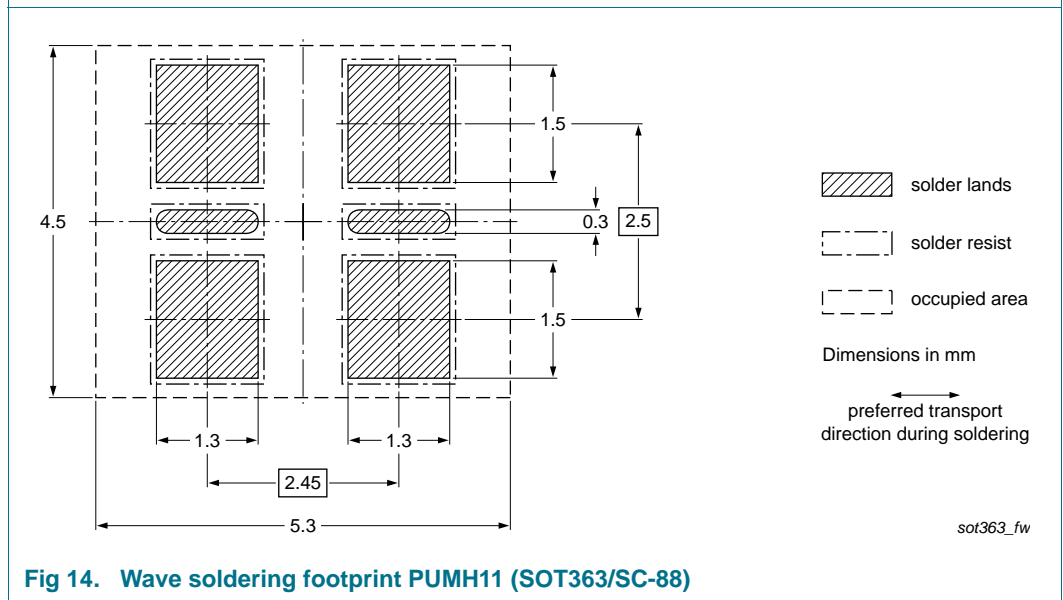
Wave soldering footprint PUMH11 (SOT363/SC-88)
